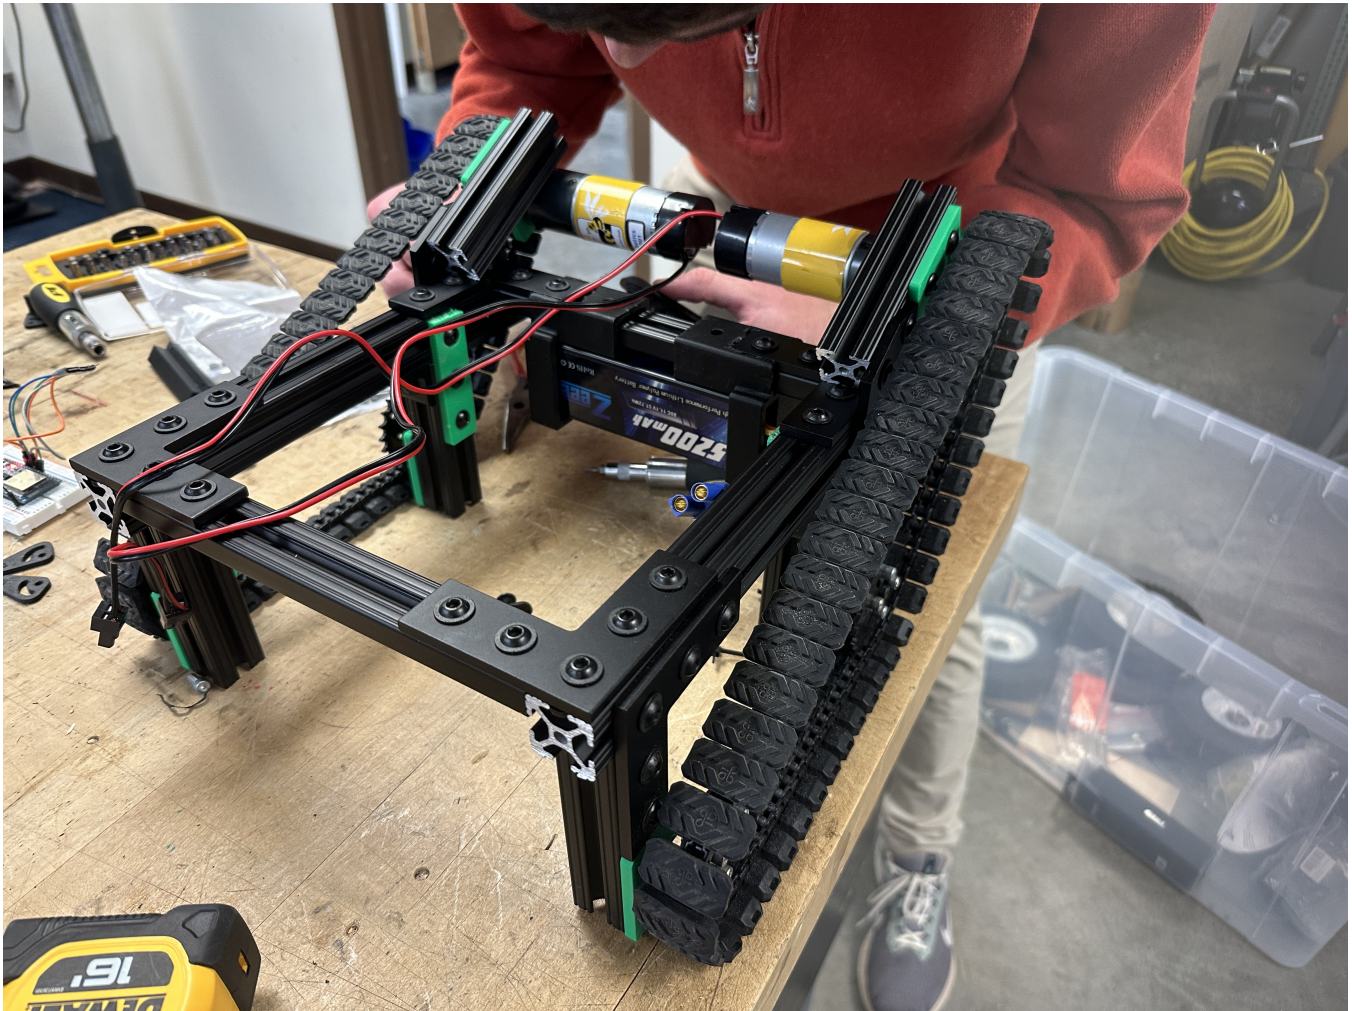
A clear view of the threaded fasteners that connect each piece of extruded aluminum. To reduce the number of TNCs, the entire body of the robot could be manufactured as 1 part.
